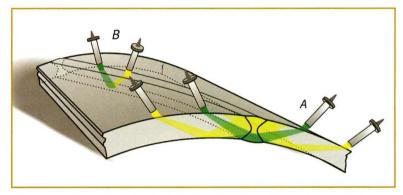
Probe configuration for helical weld testing with four longitudinal probes at *A* and two on-bead transverse probes at *B*.
